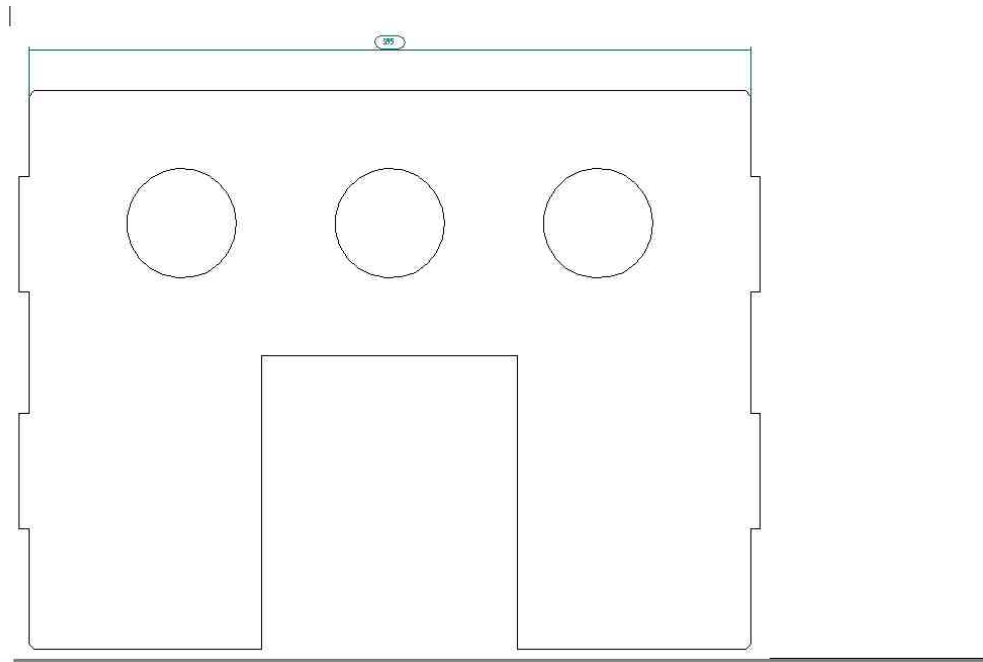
Detail folded open drawing extracted from Solid Edge: Support and baffle, right
